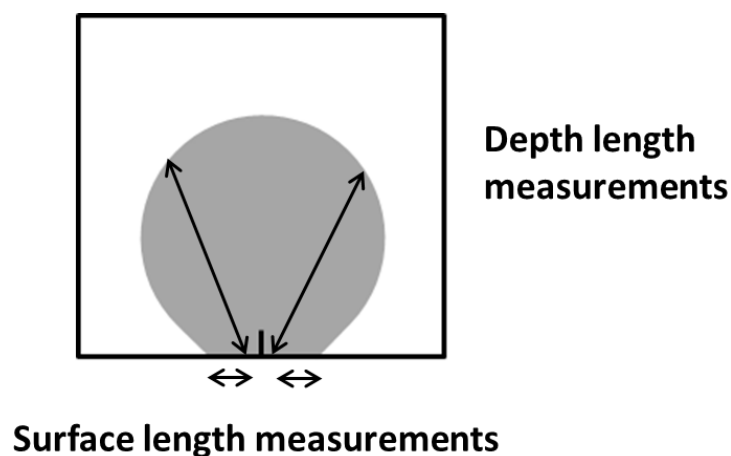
Schematic of crack tunneling measurements on the face of a fracture surface
